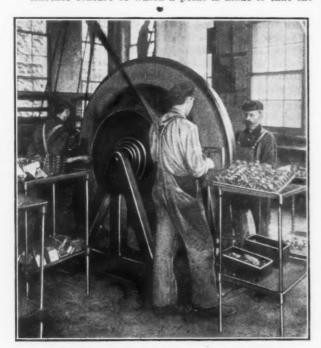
The 6-Ft. Disk Grinder Built by the O. K. Tool Holder
